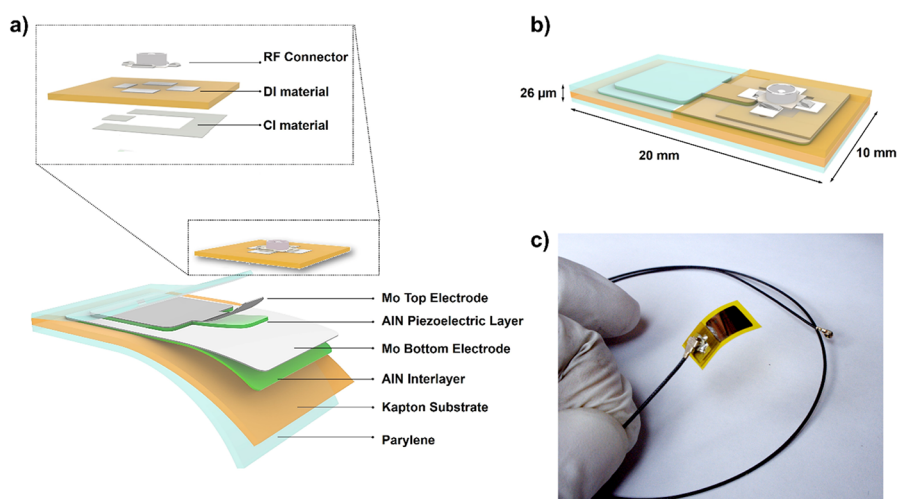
Flexible piezoelectric sensor structure. Exploded schematic drawing of the multilayered flexible transducer (a), with a detailed 3D view of the layers composing the external package (inset). Design and dimensions of the final sensor (b) and a picture of the completely processed sensor (c).
